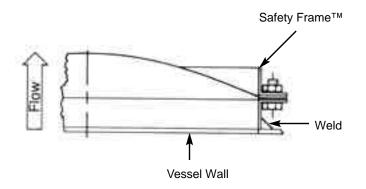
VENT-SAF<sup>™</sup> Assembly Welded to the Customer Structure
